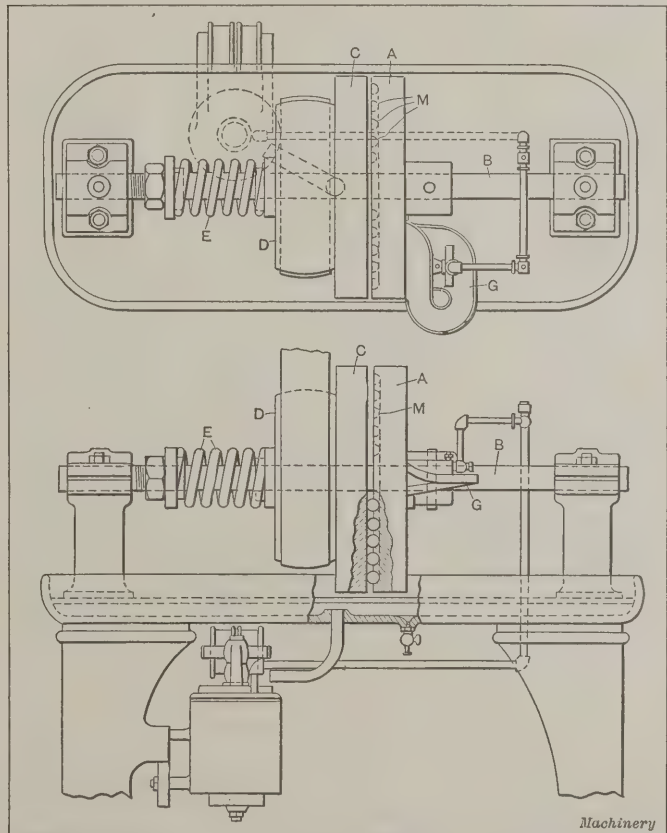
Improved Hoffmann Ball Grinding Machine—U. S. Patent No. 868,926
